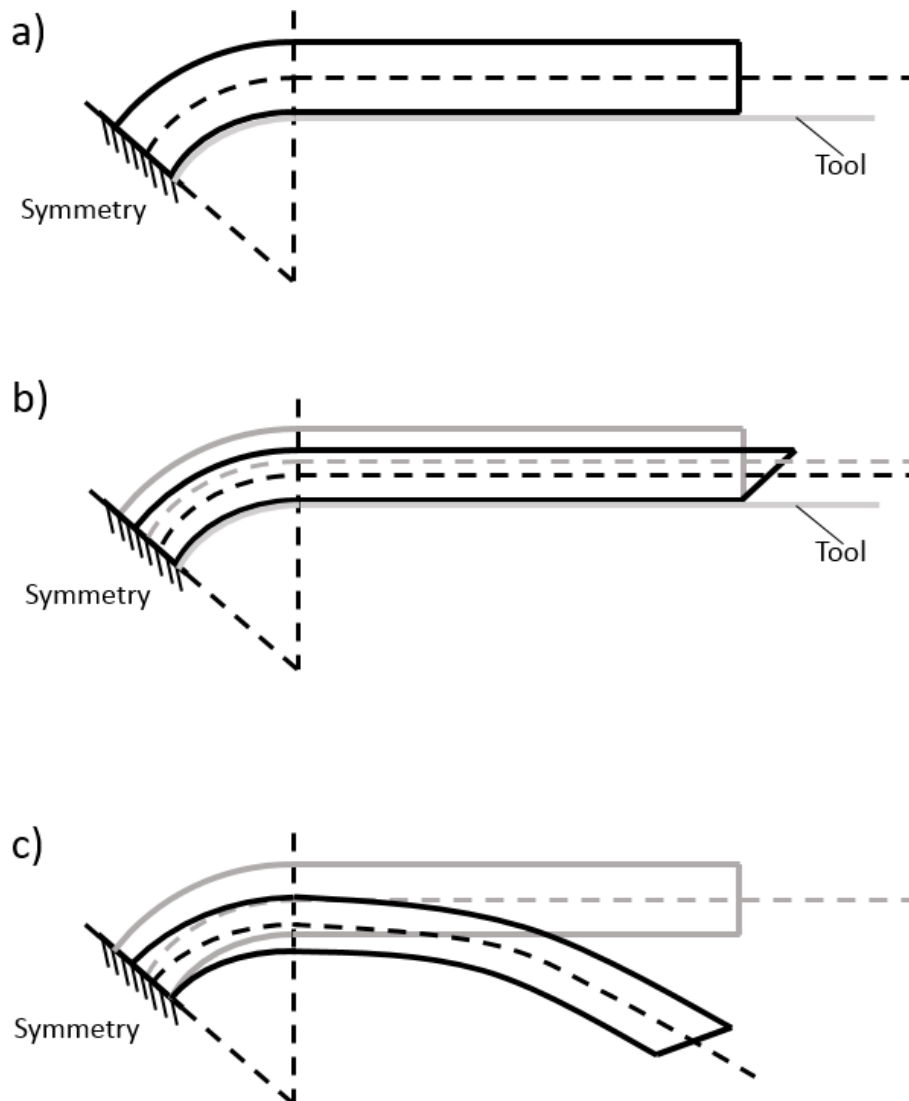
Half L-shape schematic due to symmetry a) initial shape on tool b) interlaminar shear deformation on tool c) de-molded shape where interlaminar shear had taken place with bent corner section and flange
